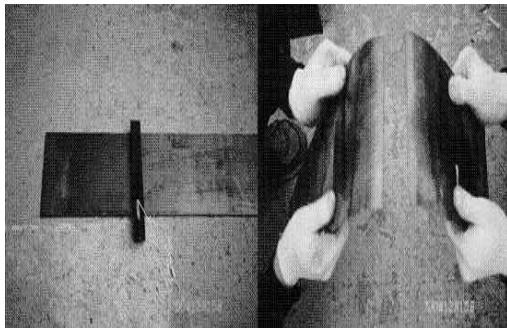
Cut 3mm steel plate (explosive:72.5g/m)
